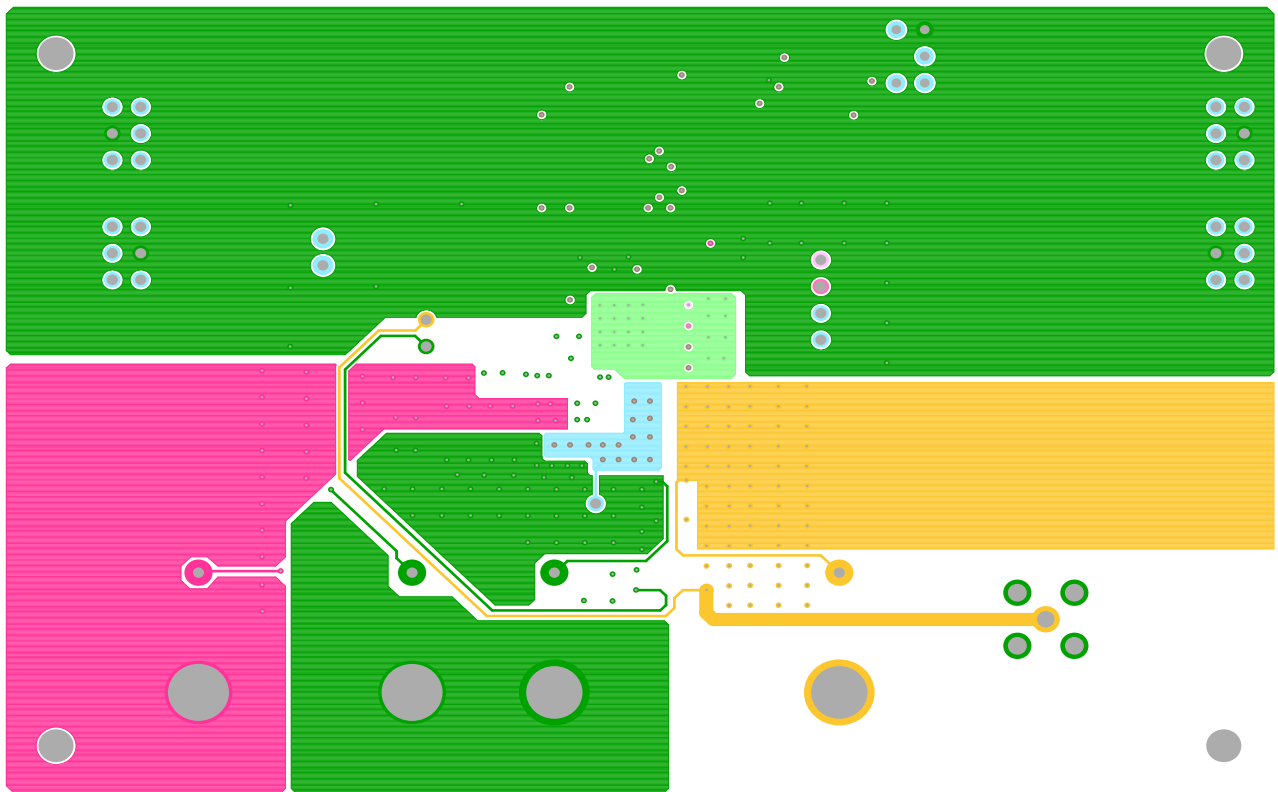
PCB - INNER LAYER - LAYER 3 (TOP VIEW)
